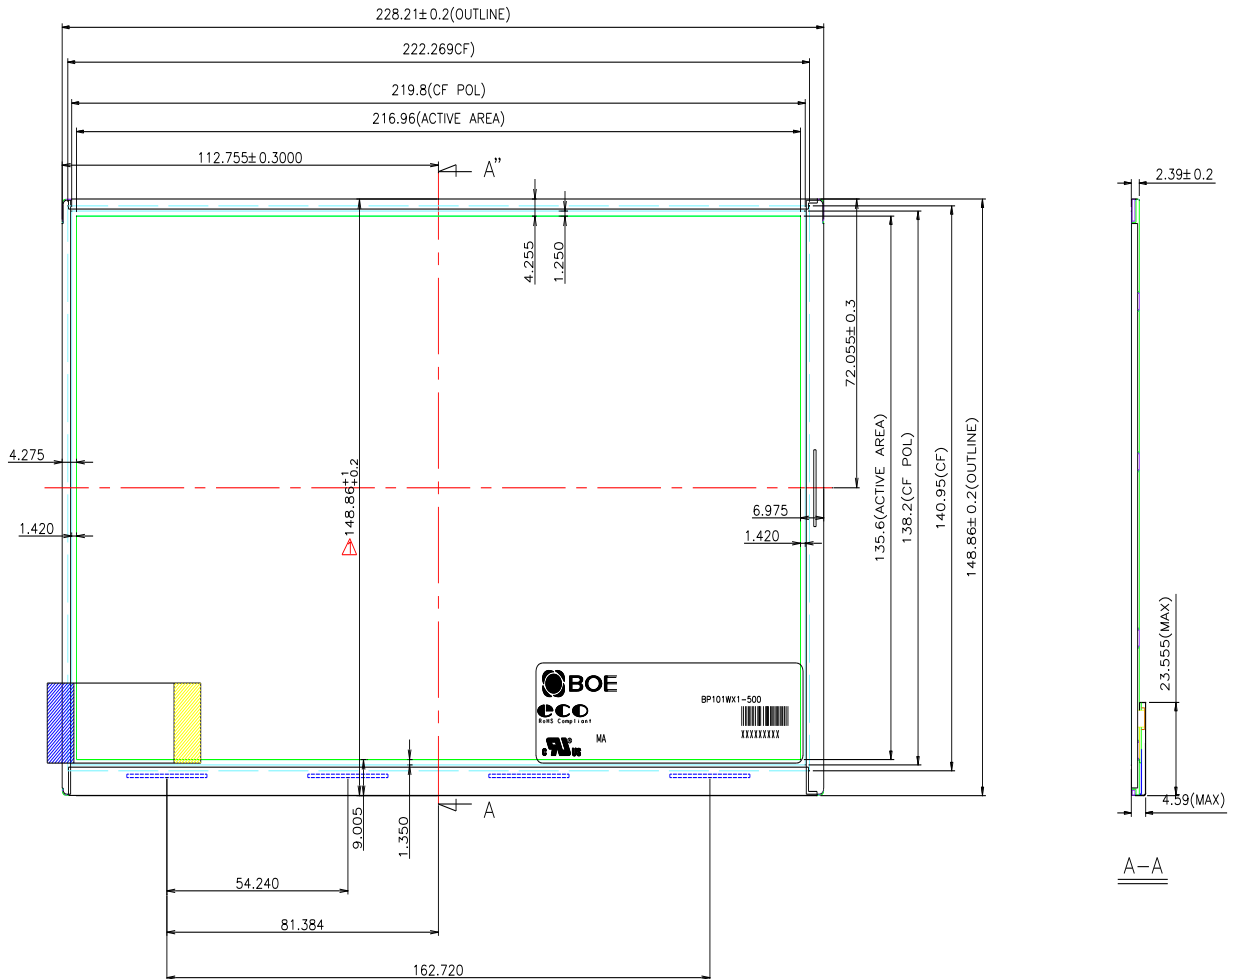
TFT-LCD MDL Outline Dimensions (Rear view)
